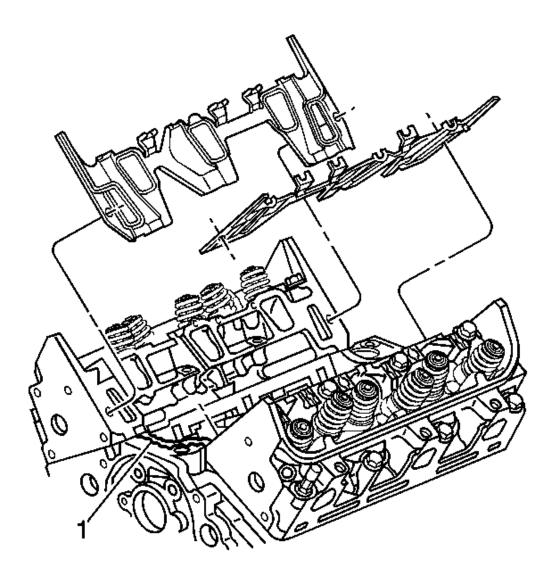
Intake Manifold Gaskets & Engine Block Courtesy of GENERAL MOTORS CORP.
